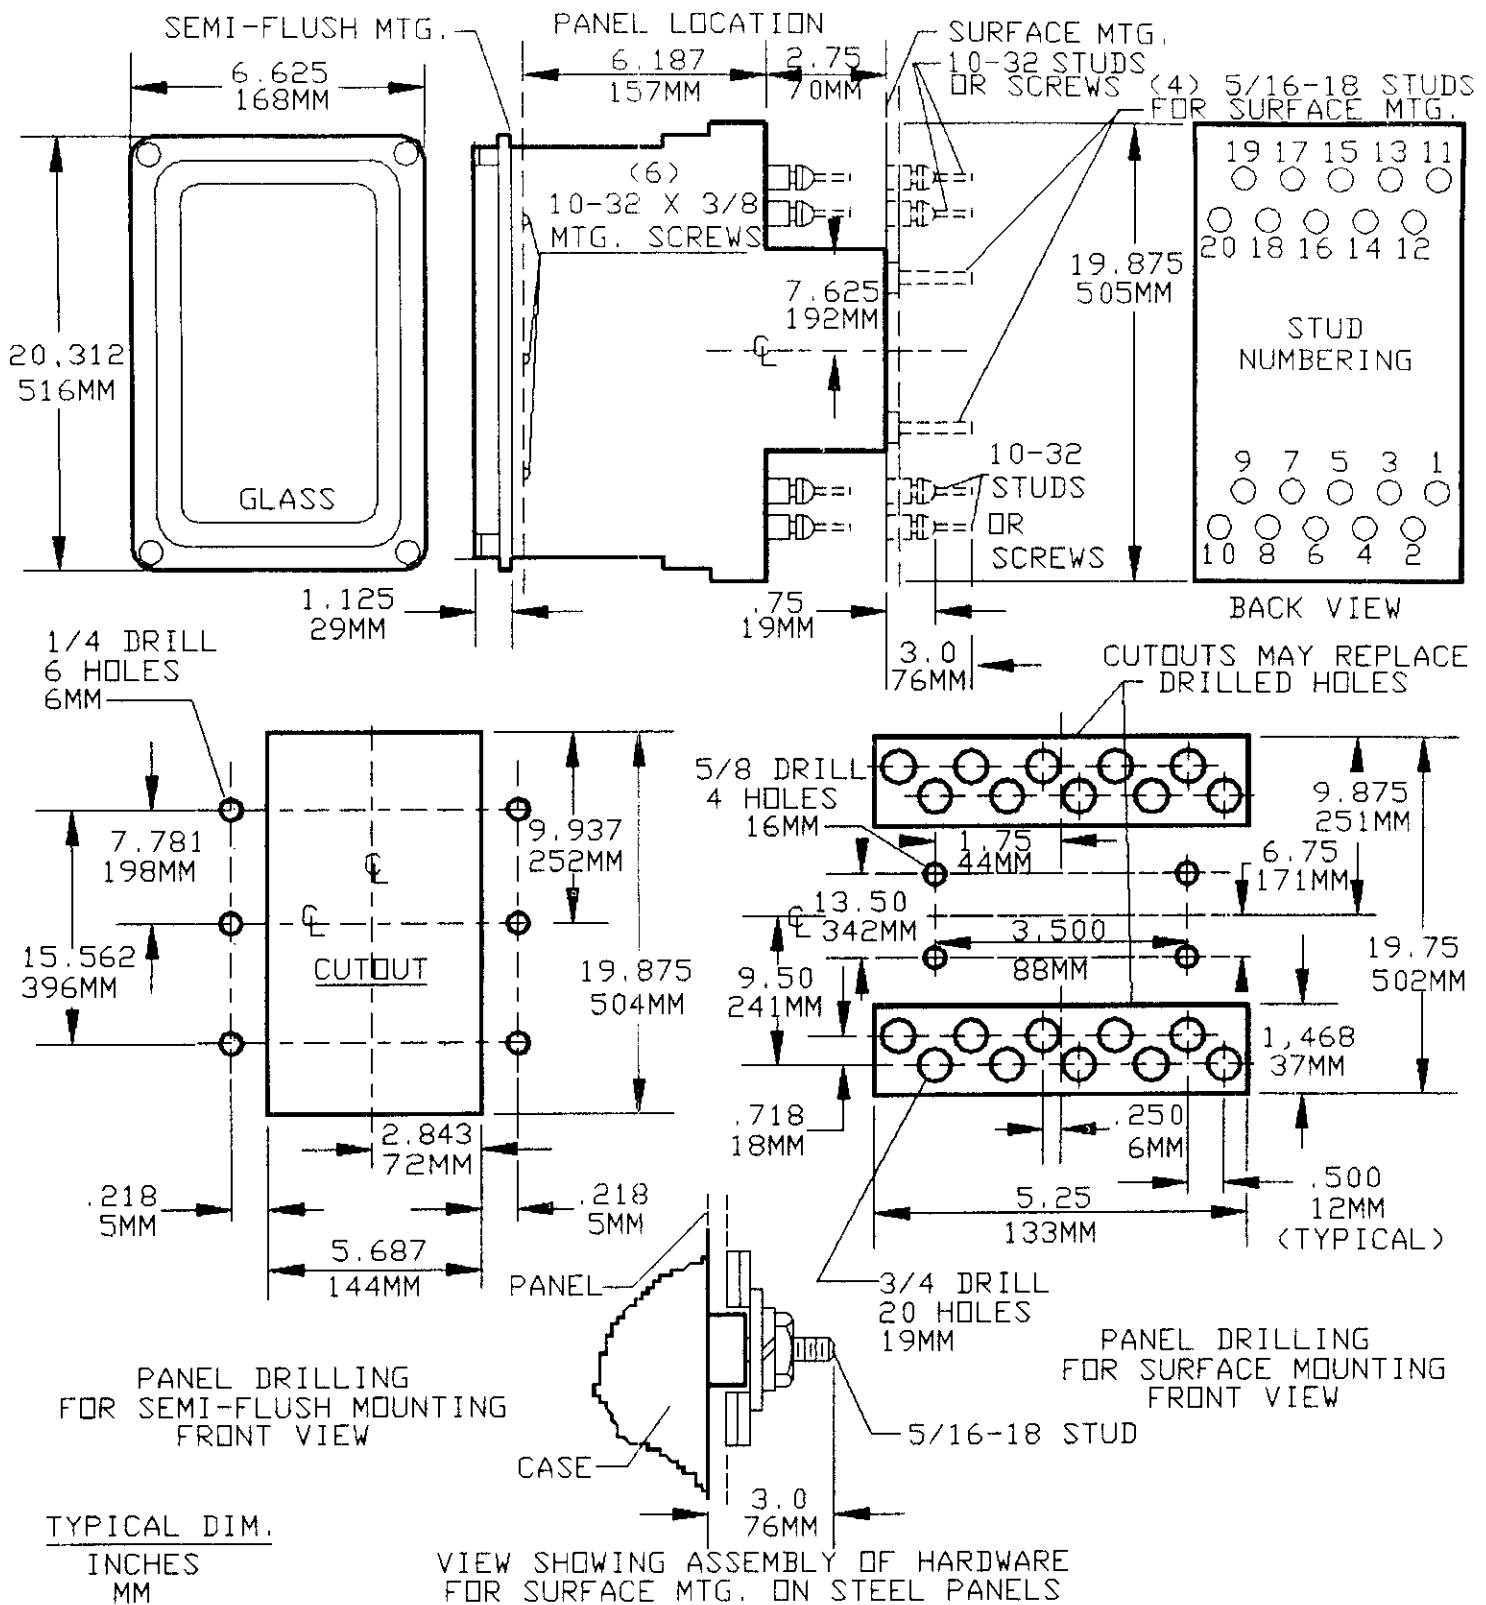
(0178A7336-6) Outline and Panel Drilling Dimensions for the CEY52A Relay
